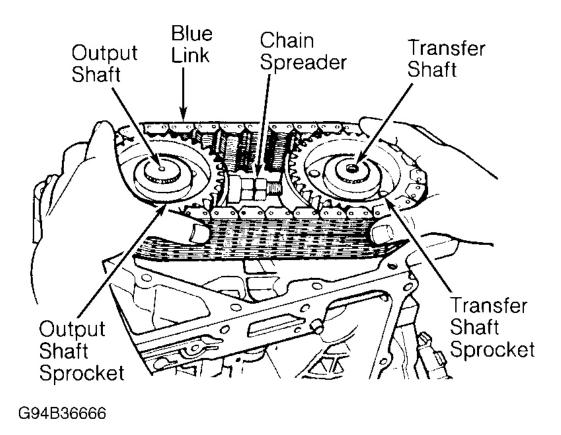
Removing Transfer Drive Chain & Sprockets Courtesy of CHRYSLER LLC
